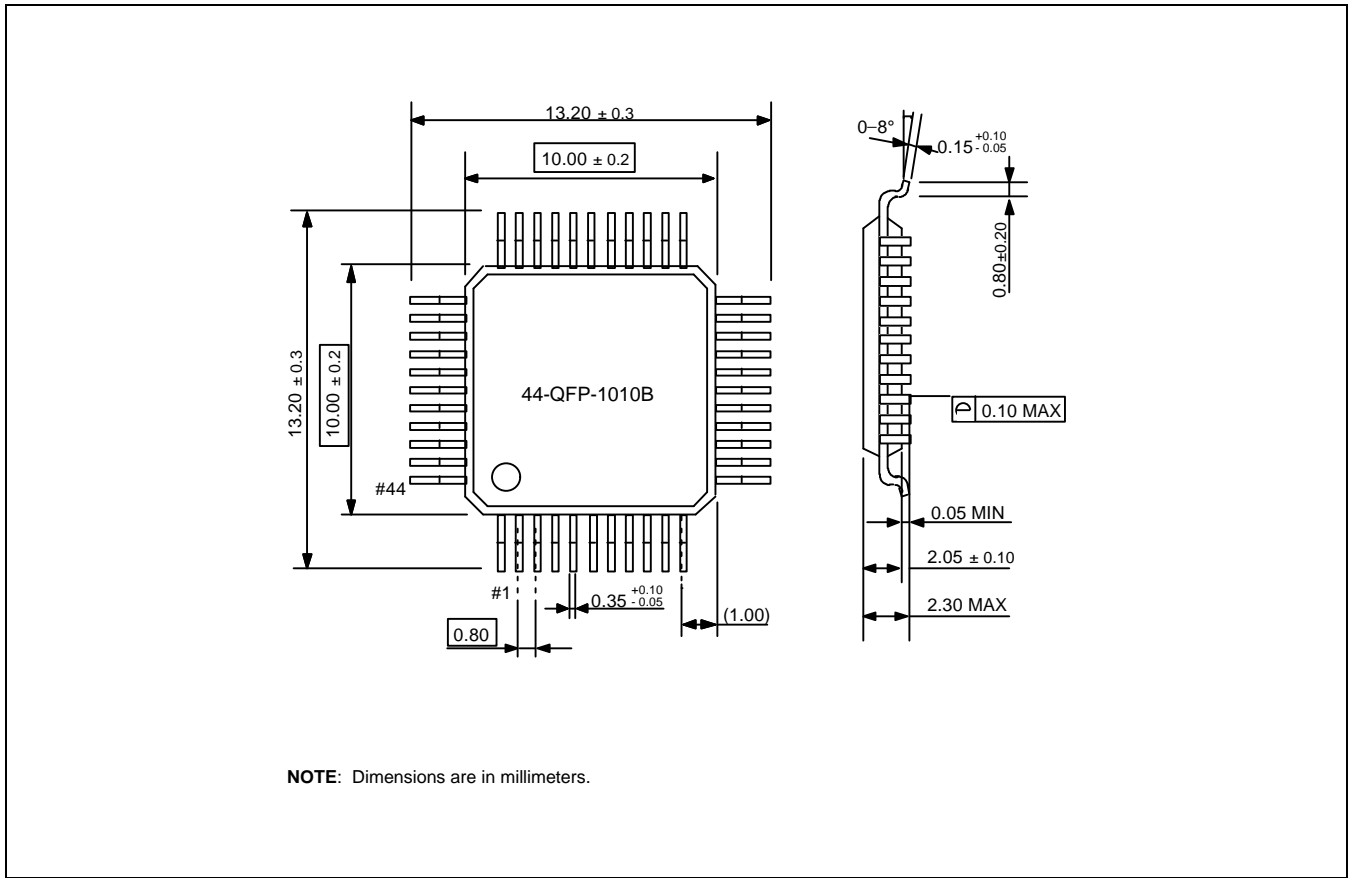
44-Pin QFP Package Mechanical Data (44-QFP-1010B)
